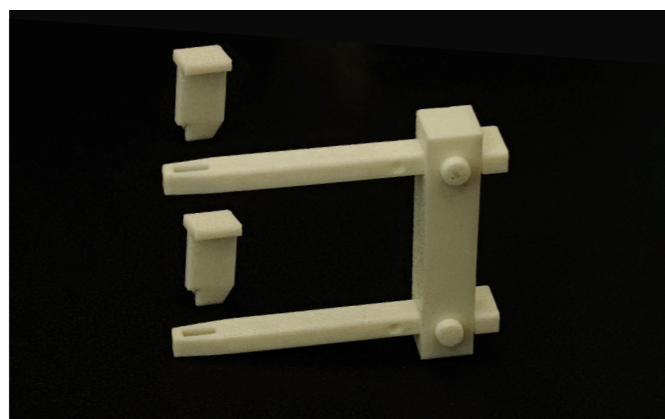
Physical prototype of insert I3- Design iteration 3 | Source: Author
